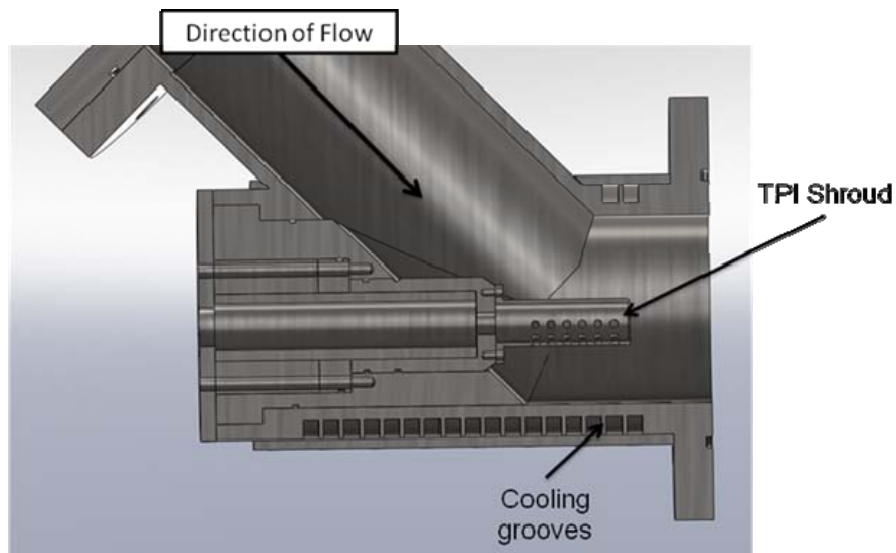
Cutaway Illustration of the Single-Inlet Arm Design
